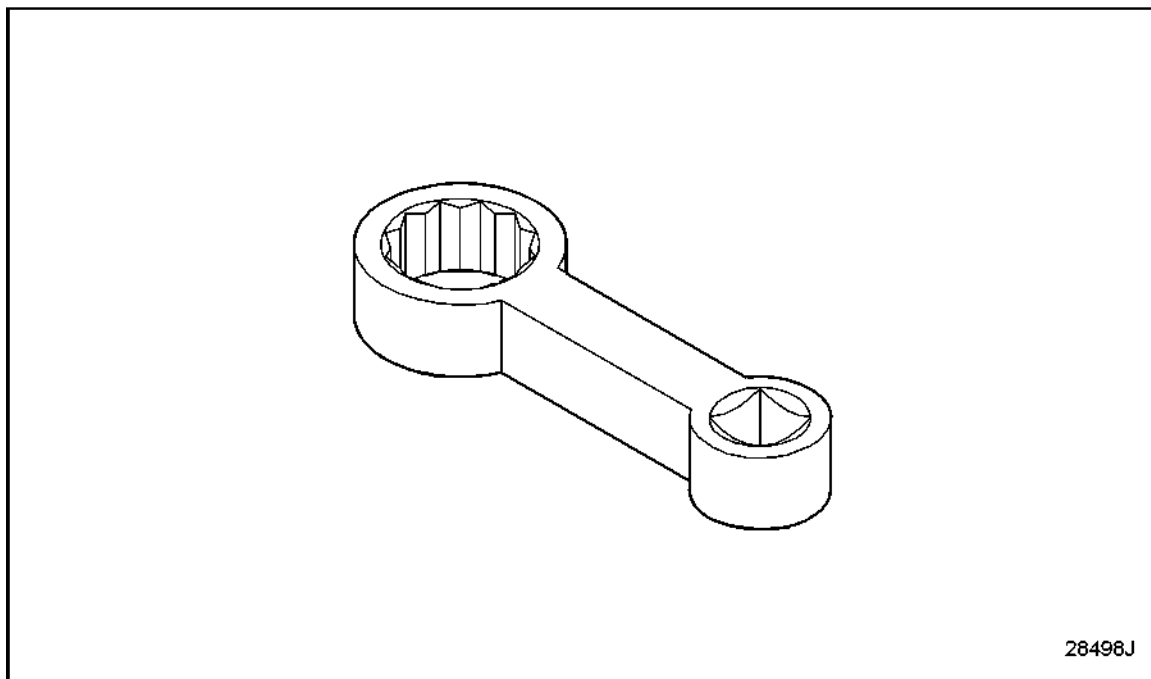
Cam Coupling Torque Wrench Adapter, J 28462
